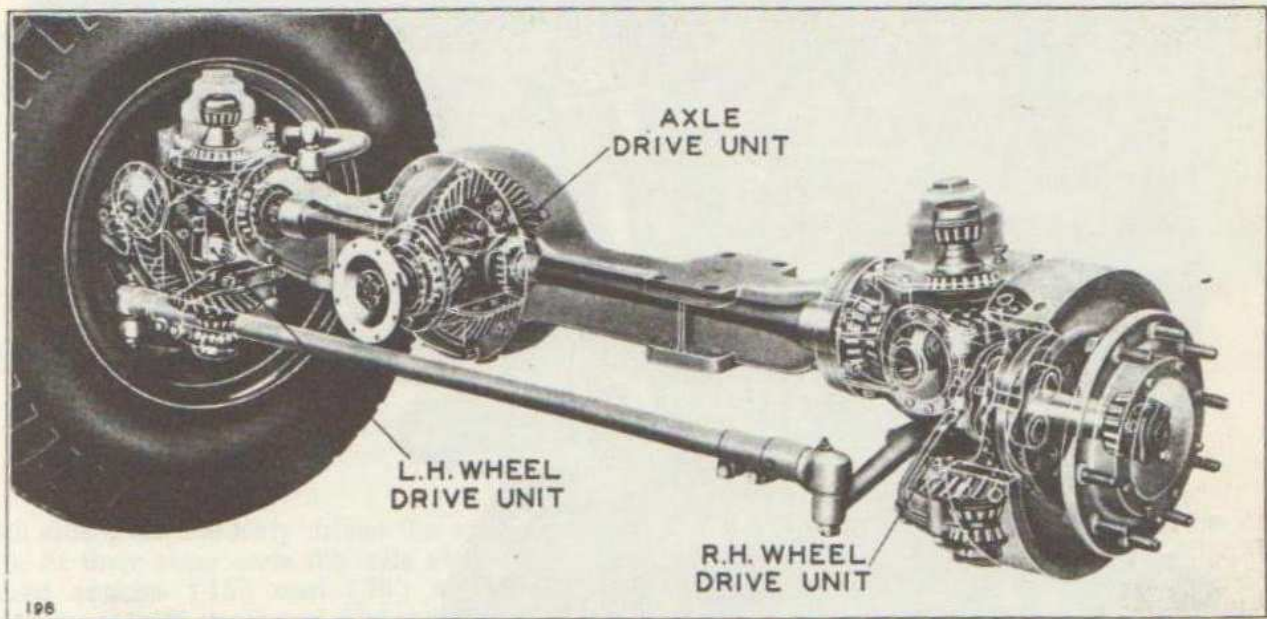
Phantom View of Front Axle Assembly with Right Hand Wheel Removed
